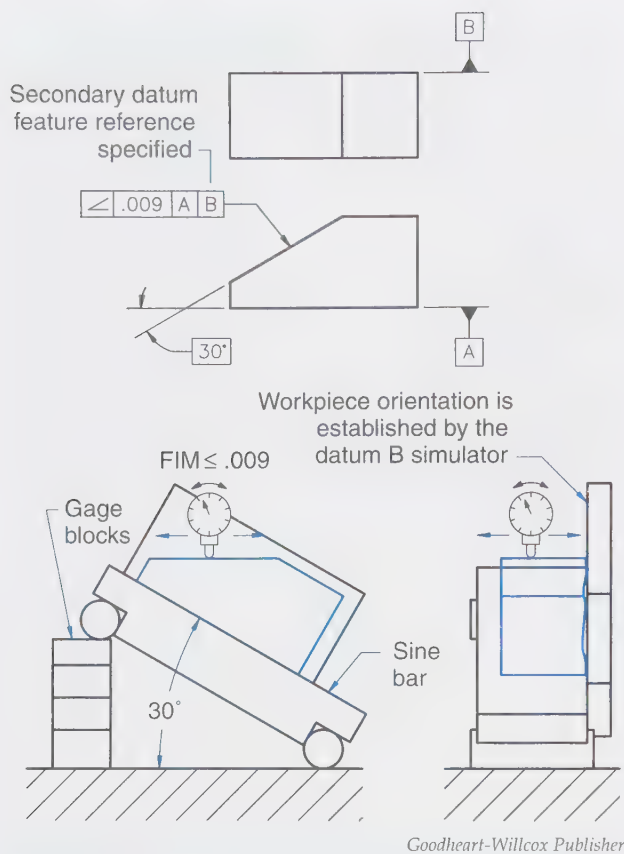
All referenced datums must be simulated when checking angularity tolerances.
